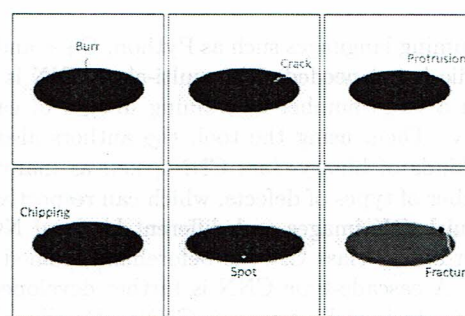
Training image samples including typical defects such as burr, crack, protrusion, chipping, spot and fracture.
